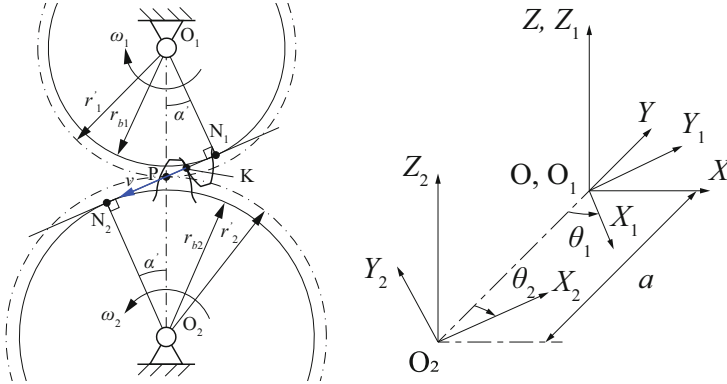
Left figure shows the meshing condition of a gear pair. Upside gear is an involute gear, and downside gear is conjugate to the involute gear. v is the velocity component of both gears in the direction of the common normal on the contact point. Right figure shows the coordinate frame. $O - XYZ$ is static. $O_1 - X_1Y_1Z_1$ and $O_2 - X_2Y_2Z_2$ rotate with involute gear and cylindrical variable ratio gear, respectively.
